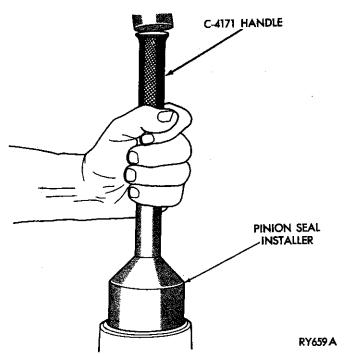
Drive Pinion Gear Shaft Seal Installation
